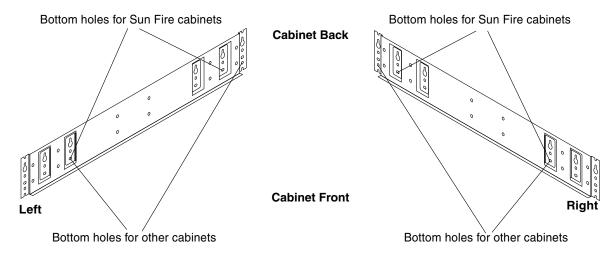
Bottom Holes for Securing the Mounting Bracket to the Cabinet
